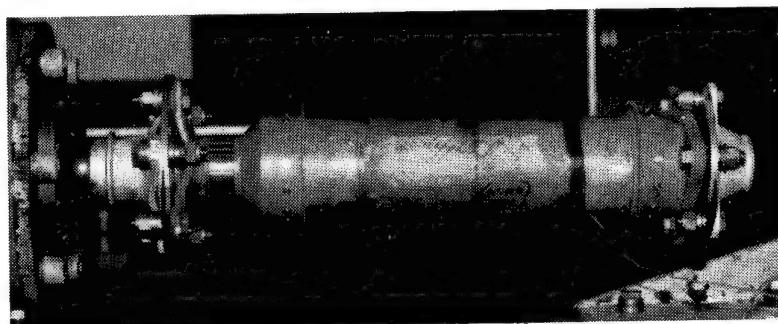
Model 360 Drive System: Composite Rotor Shafts
